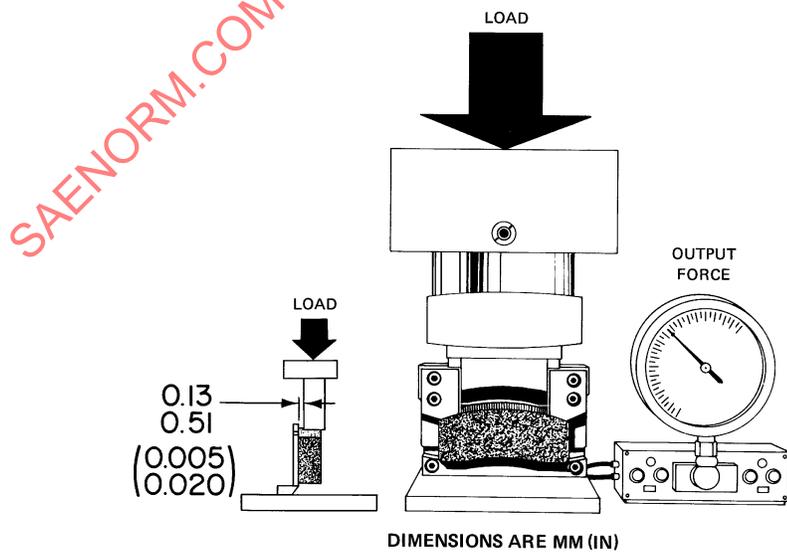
DISC BRAKE SHEAR TEST FIXTURE
